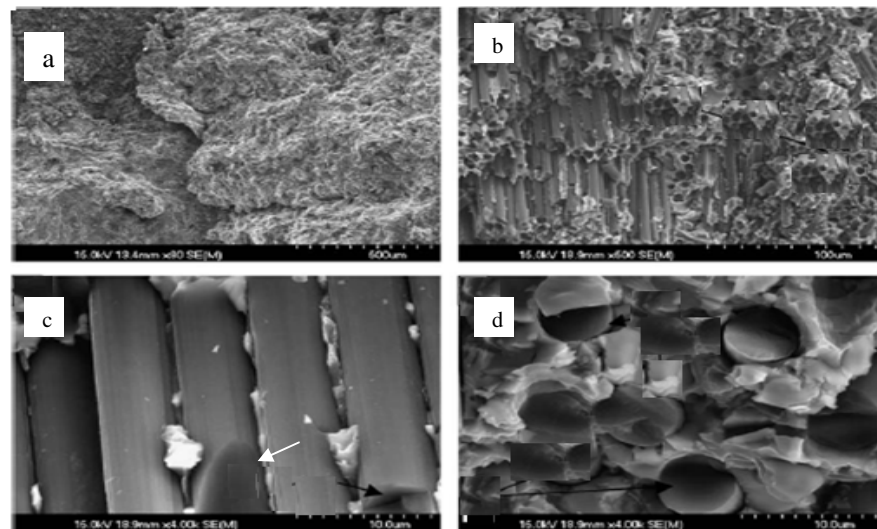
Shear fracture surfaces of the brazed joint (He, et.al; 2006)
